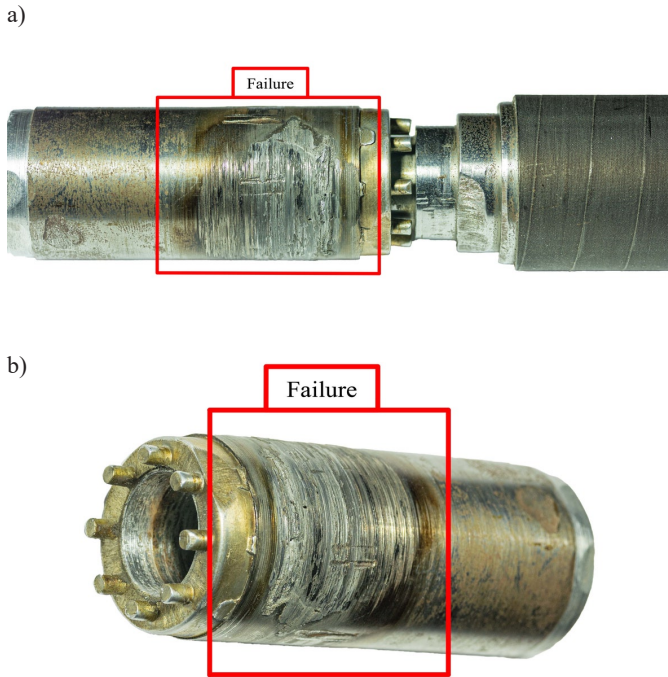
Pictures showing a) a zoom-in on the damaged generator attached to the shaft, b) damaged generator. The damage is inside red rectangles
